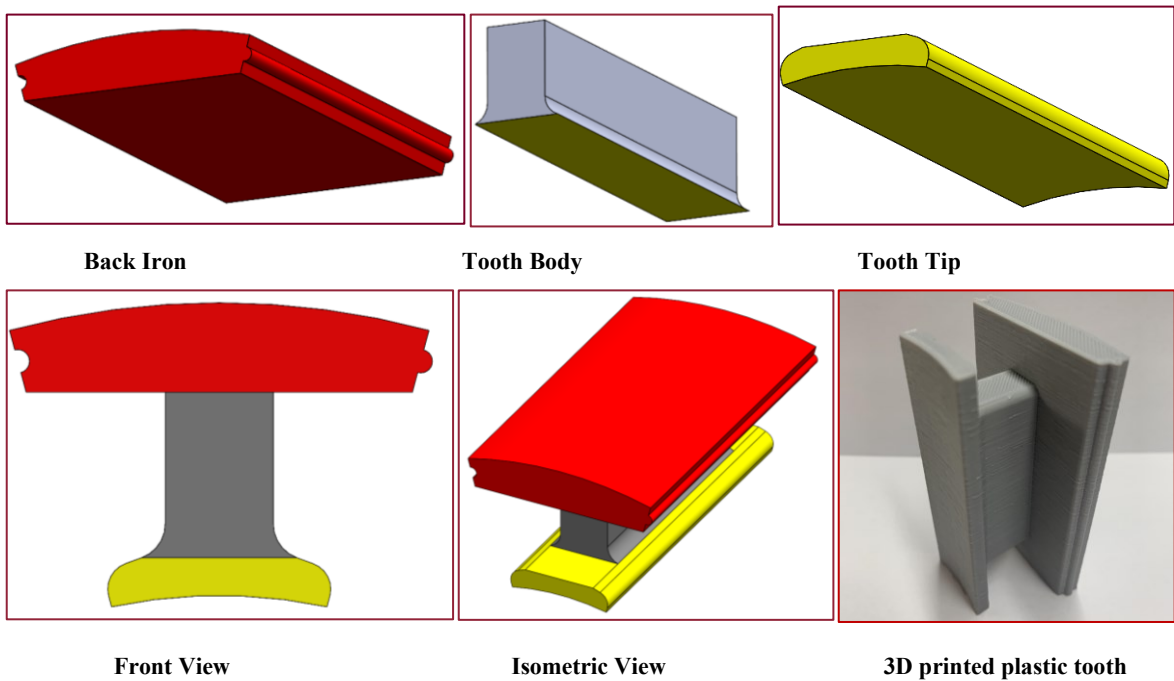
Tooth-2 (SMC tooth) views with 3D printed plastic tooth
